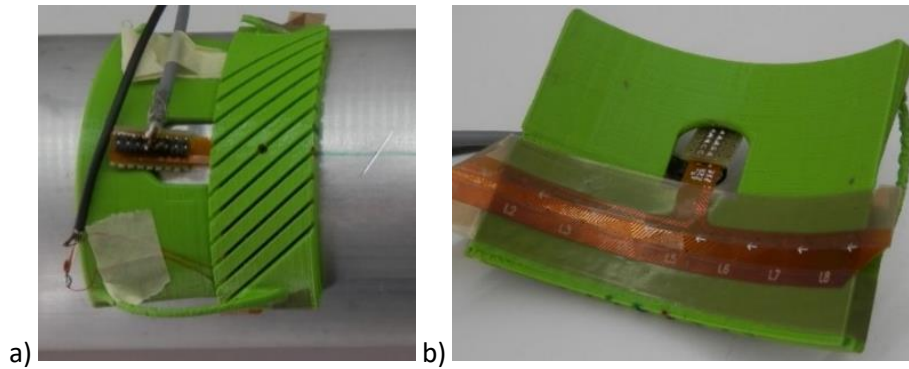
Outer surface section inspection probe; a) probe over the sample; b) pick-up coils of the probe.
